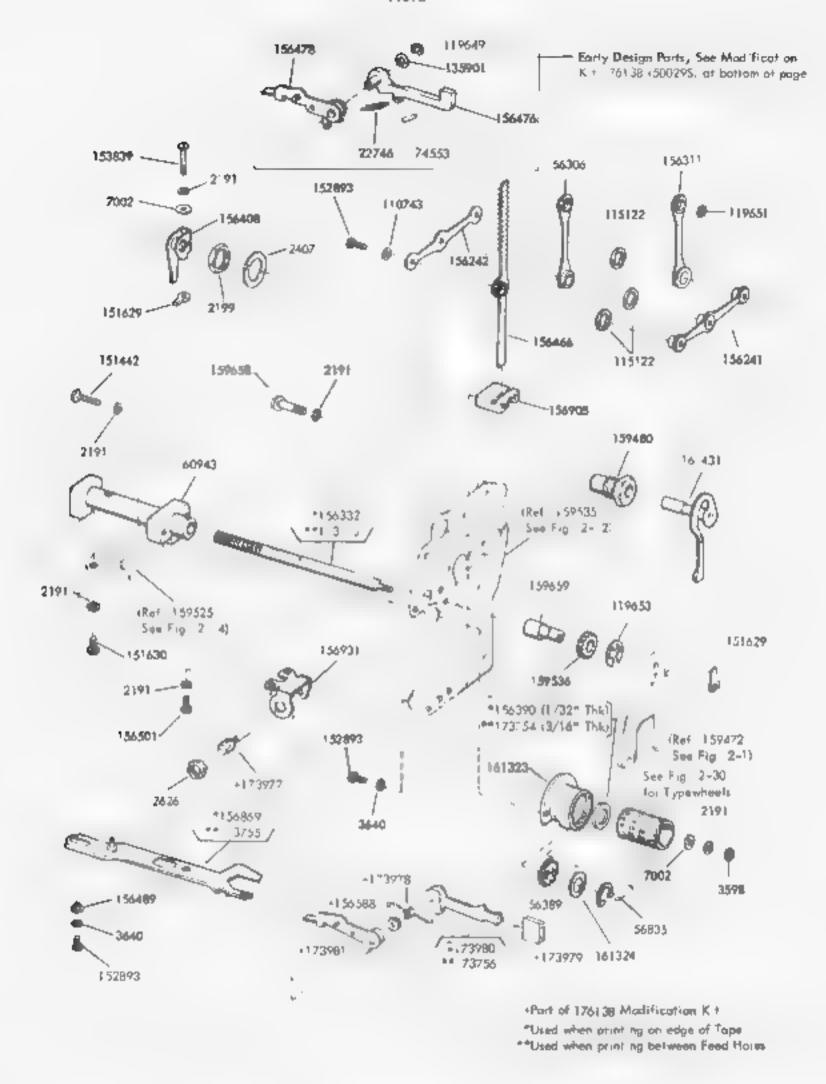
ROTARY POSITIONING MECHANISM
